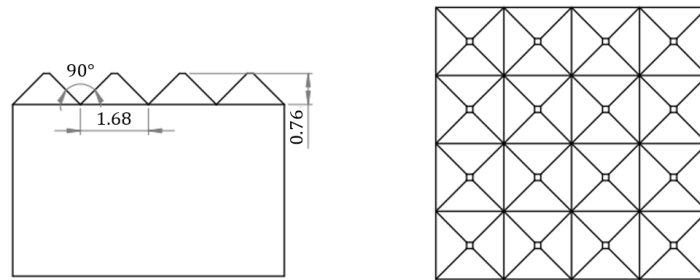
Stretch bend die surface knurling detail (all dimensions in mm)
